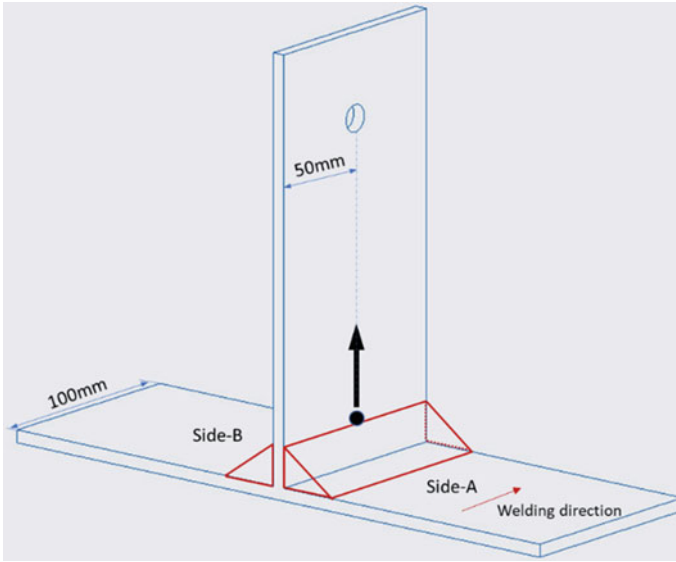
Location of the residual stress measurement at the weld toe location, represented by dot near the upper weld toe and middle of the weld length. Arrow shows the direction of residual stress measurement (normal to the weld toe line)
